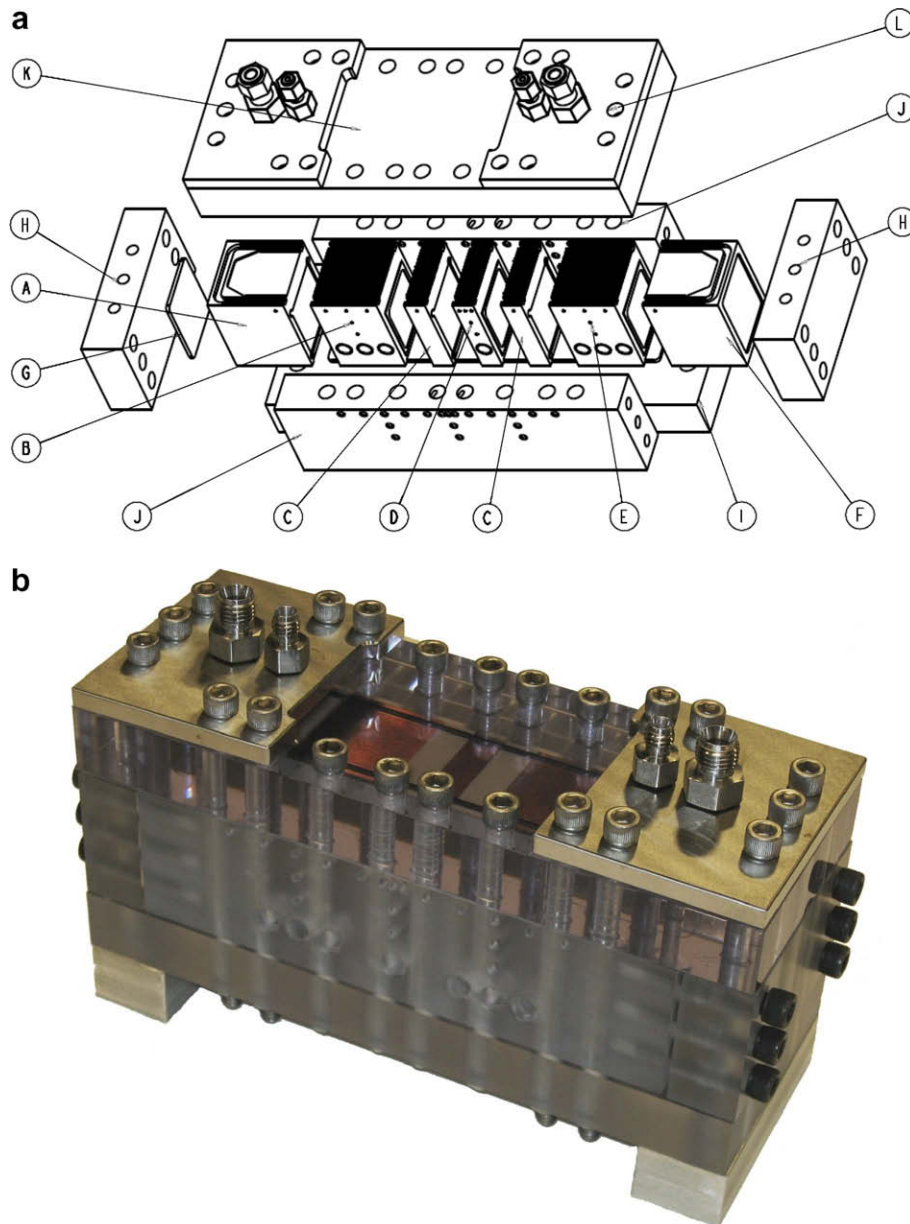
Test section assembly: (a) exploded view with the components (A) inlet piece, (B) pre-evaporator, (C) adiabatic piece, (D) test piece, (E) post-evaporator, (F) outlet piece, (G) rubber compression, (H) front and back pieces, (I) bottom piece, (J) side pieces, (K) top piece and (L) stainless steel plate with fluid ports, and (b) photograph of the assembly.
